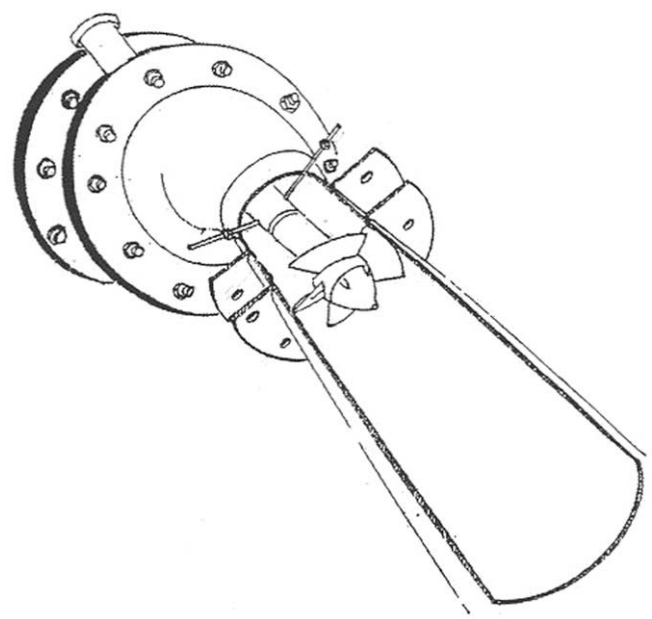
Cut through schematic view of the turbine and the main shaft after improvement.
